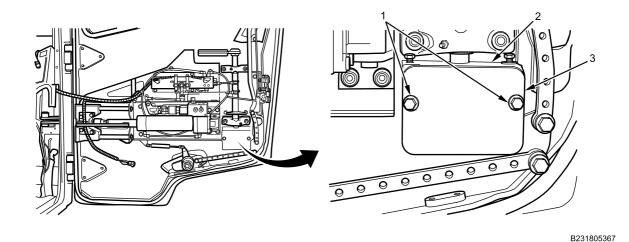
Inner Door Handle Shaft Cover Plate Removal.
